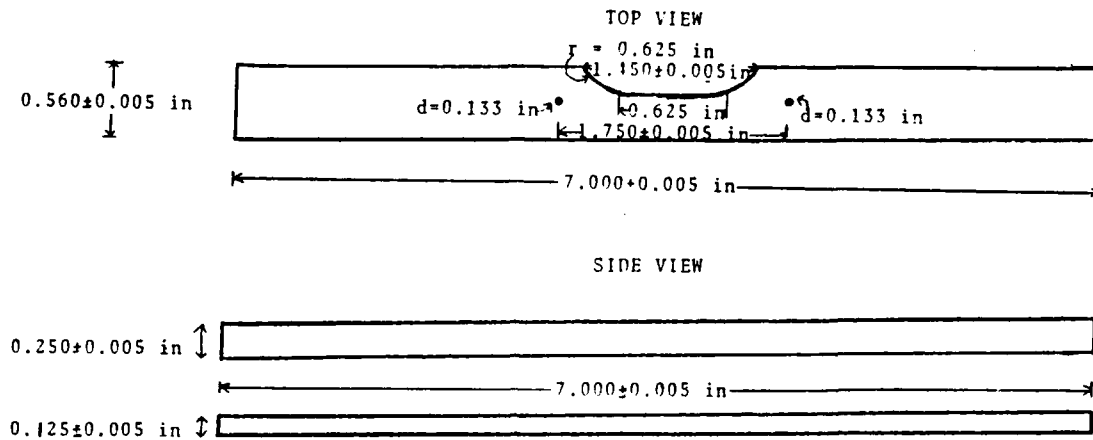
Jig Utilized to Fabricate Tensile Specimens.
